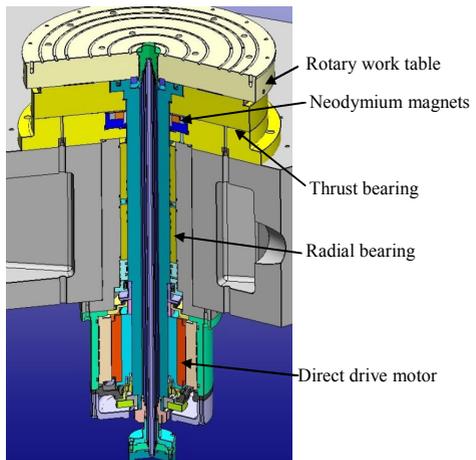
Schematic of rotary work table equipped with a water hydrostatic bearing
